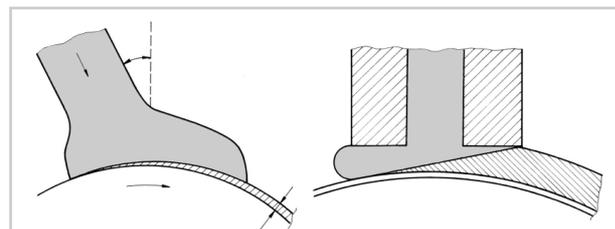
The detailed view of the single roll technique with two alternatives of the molten sample draws (shadow). Left, simple layer deposition by injecting molten stream against the rotation coolant surface the deposited ribbon leaves the roll after its full solidification (dotted). Right, a more advanced deposition through the kneading-like system enabling to form more fixed and thicker ribbons, possible of preparing streamer with multiple compositional layers.
